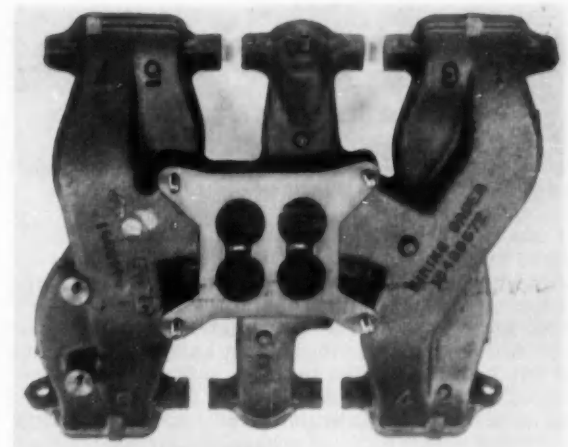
Intake manifold has a 90 deg T-shaped configuration at the intersection of the branches.
